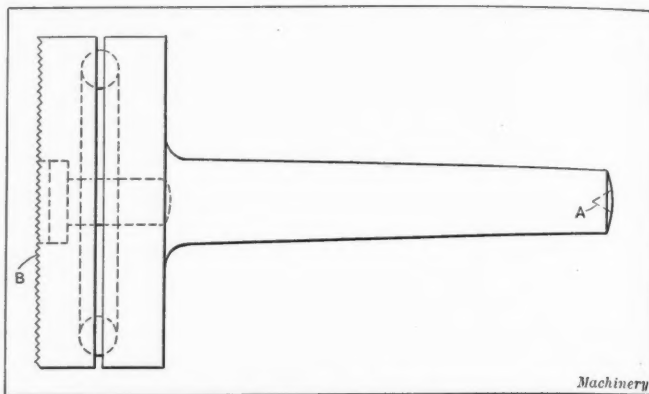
Auxiliary Tailstock for supporting Work in a Lathe with Worn Spindle Bearings
